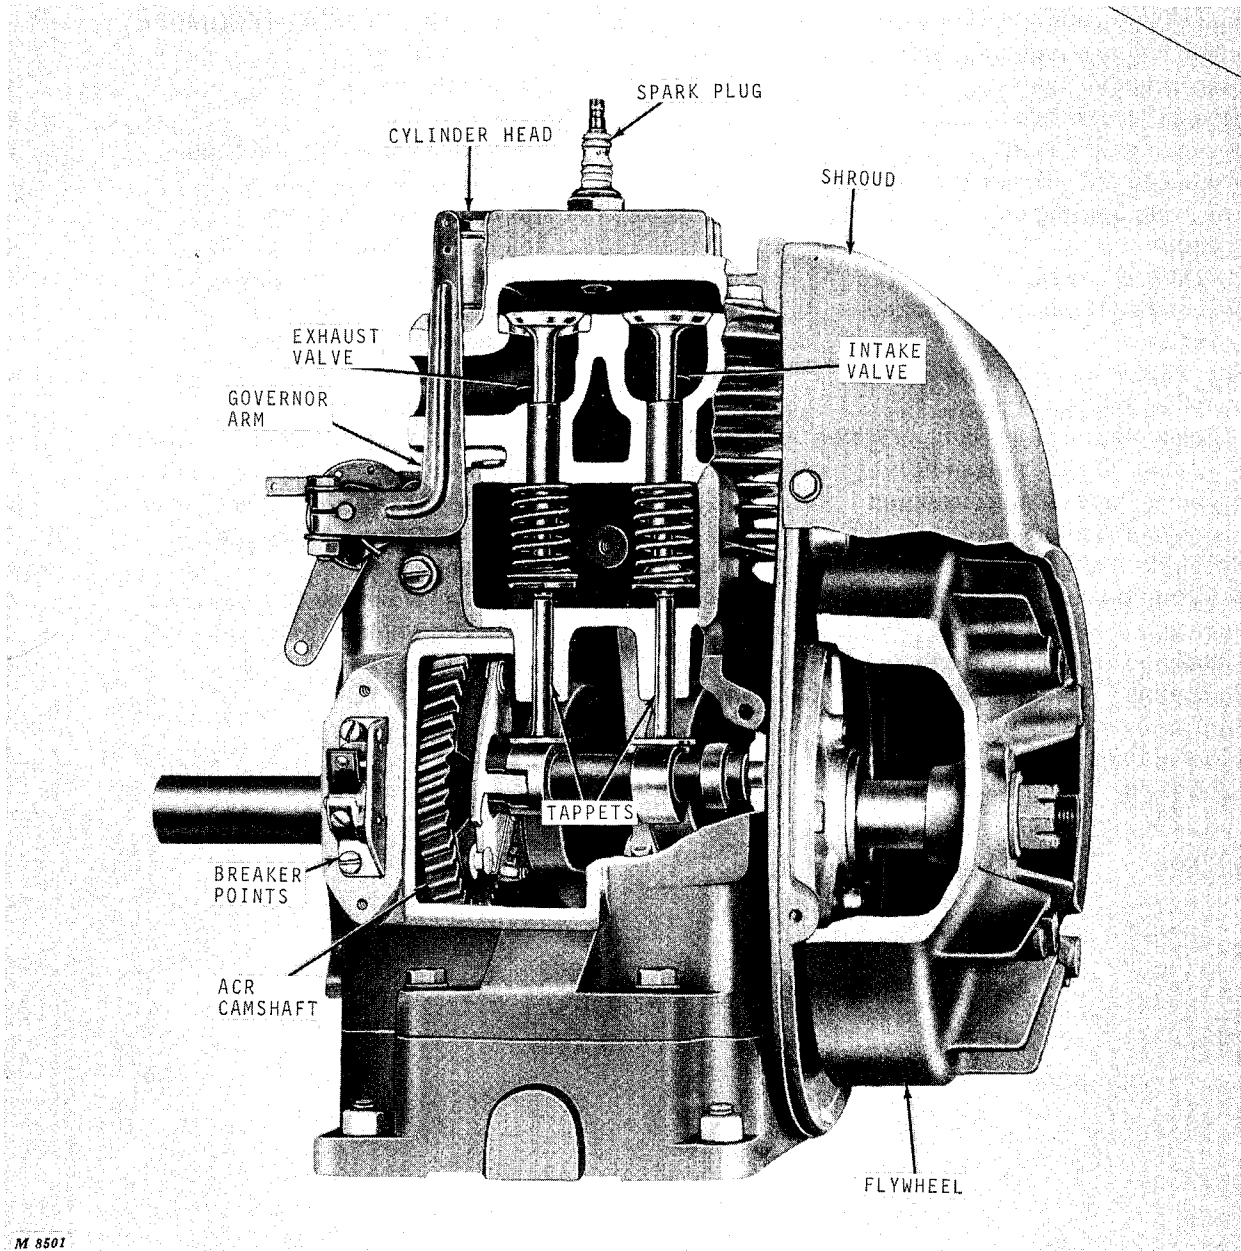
Cutaway View of Kohler K181S Engine Showing Valves and Tappets
